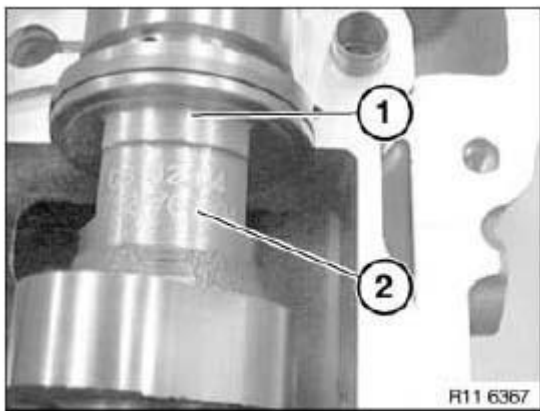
Identifying Inlet Camshaft And Part Number Position
